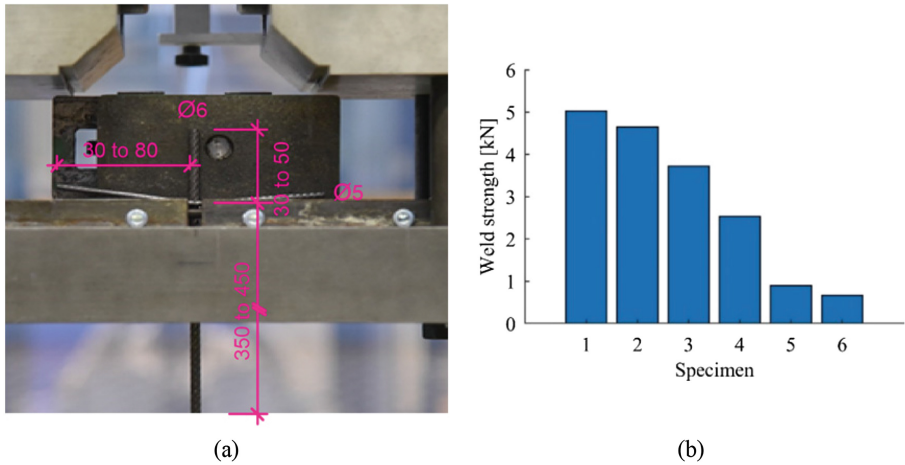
(a) Setup of the welding test (dimensions in [mm]) and (b) Results of the welding tests sorted by strength
